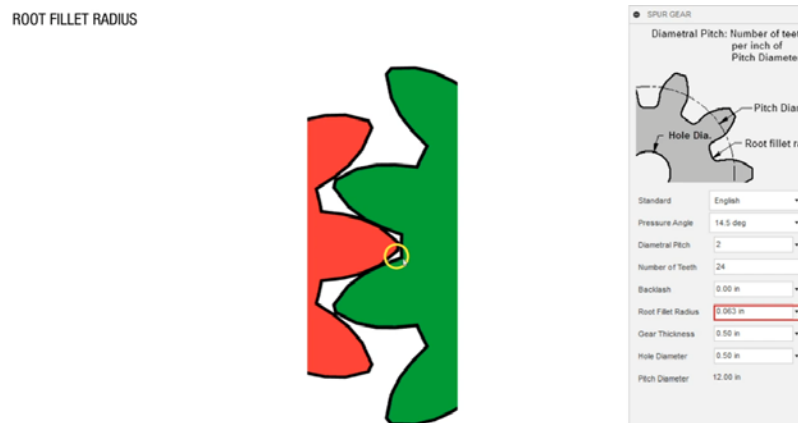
Gear fillet radius must be such that the tip of the tooth does not touch the bottom of the root fillets from Fusion 360
